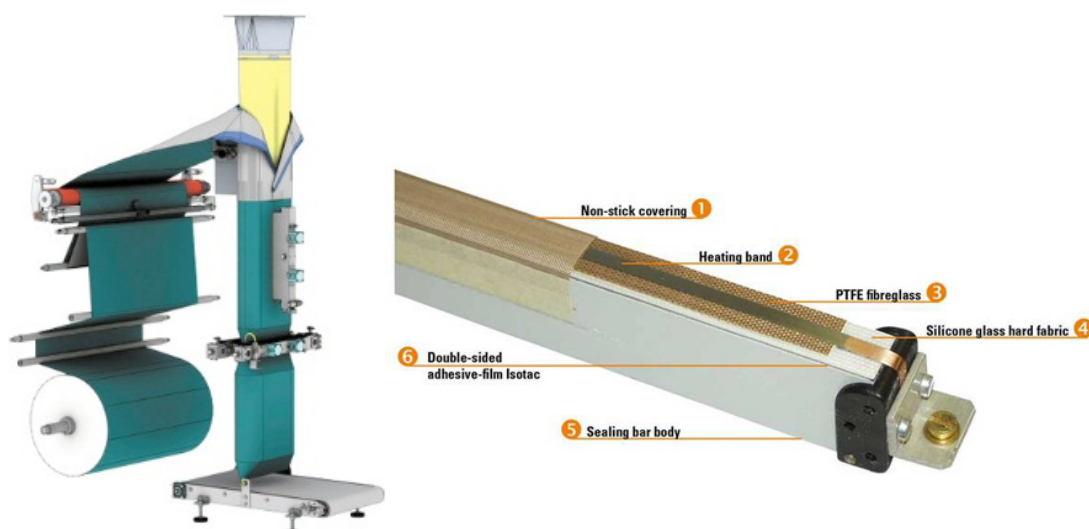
Left: Vertical Form-Fill-Seal Bagging Machine With heat seal Jaws (<http://www.pkgsys.com/products/packaging-and-bagging/vertical-form-fill-seal-bagging-machine-mk>); Right: Sealing bar (<http://www.joke-fs.de/This-is-how-it-works.727.0.html?&L=3>)
